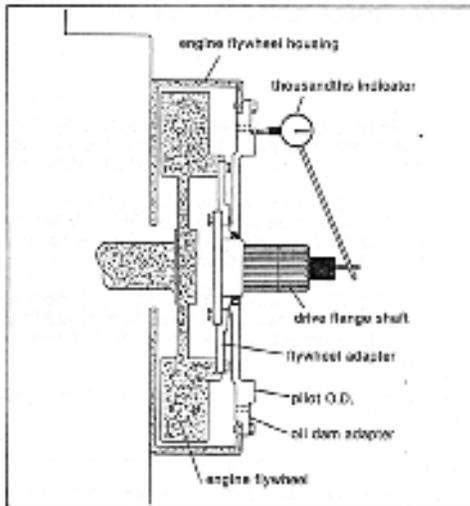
Dial Indicating Oil Dam Adapter Pilot O.D.
